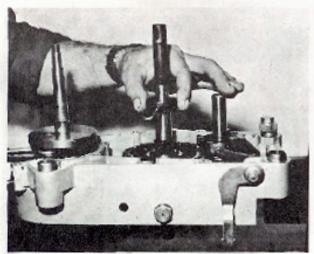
Release the pedal starter spring from the crankcase and remove the entire assembly
